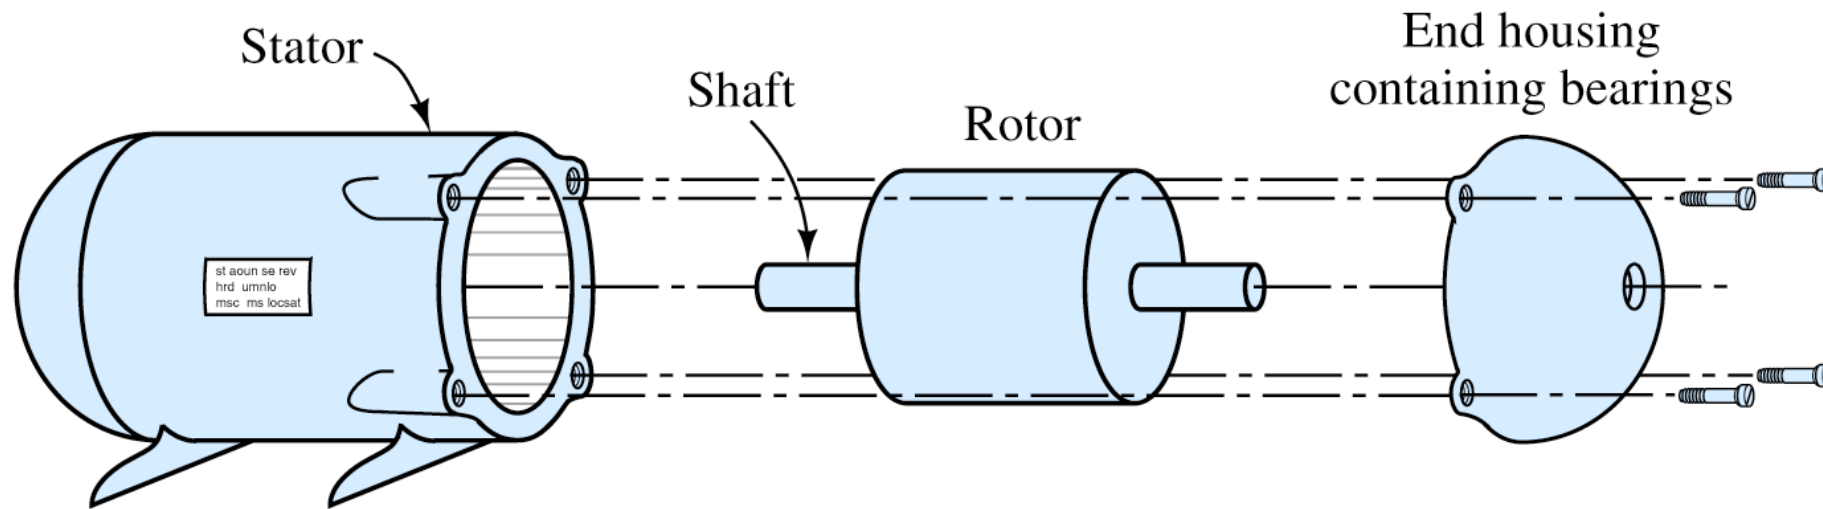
An electrical motor consists of a cylindrical rotor that spins inside a stator.
